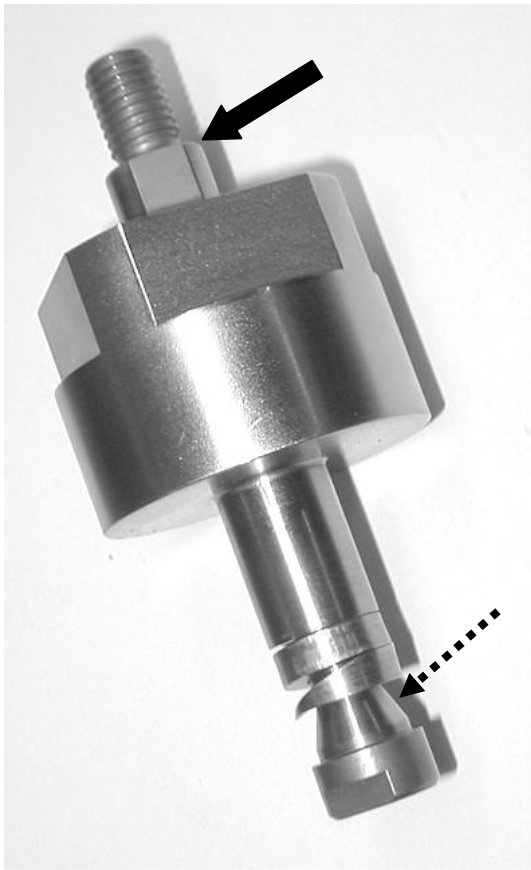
Hold the base pull bolt (thick arrow) with two fingers and thread the cone pull bolt (dotted arrow) with insert fully into it, left-hand thread
